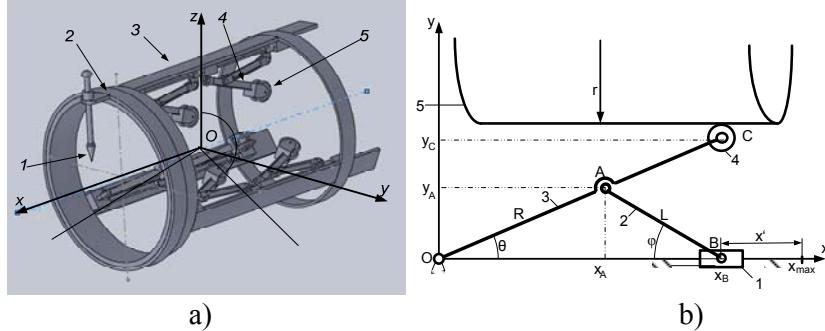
Positioning system, version I; a) view, 1-end effector, 2-rotation ring, 3-corp, 4- rolling subassembly, 5- wheel, b) structural scheme.
